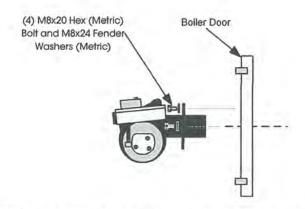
OB-9 and WB-15 chamber swing door burner mounting
